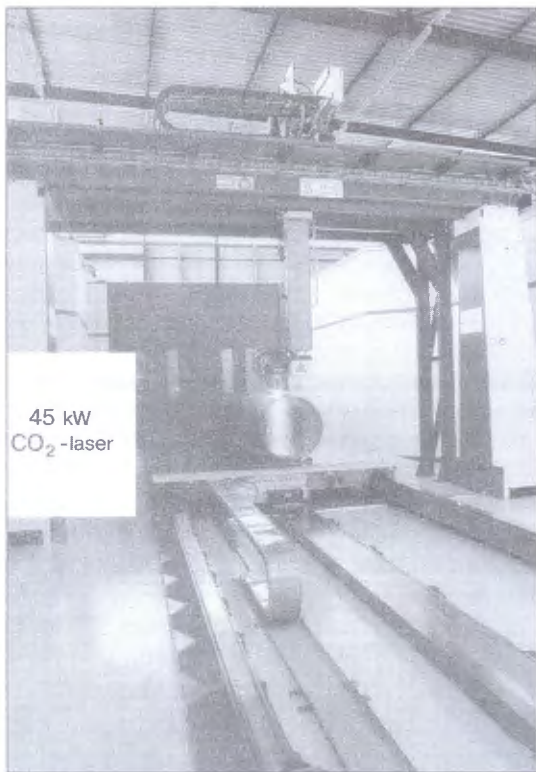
CO₂-laser of 45 kW power with transverse pumping and six axes processing center (Institute of Welding Equipment in Matz, France)
